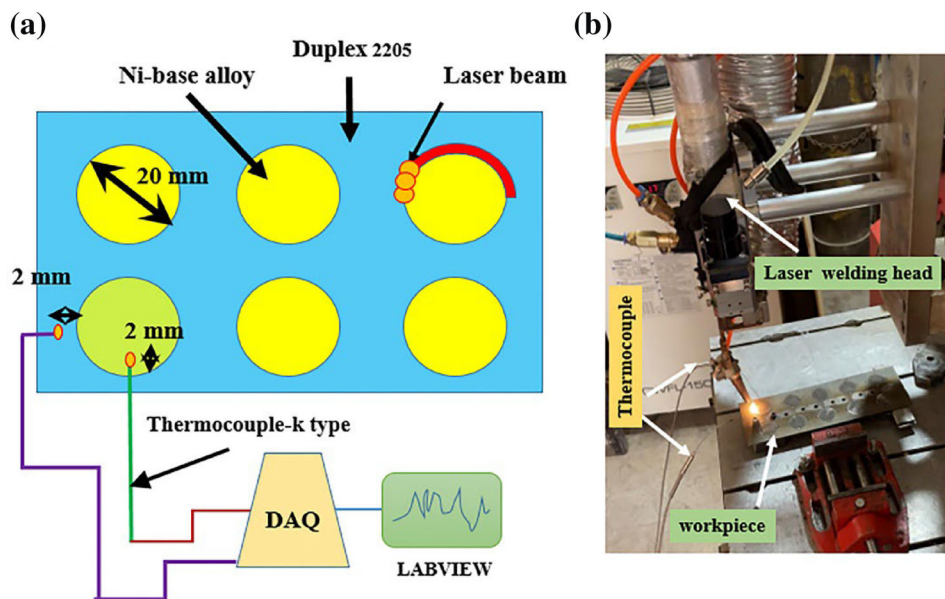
Setup of laser welding experiments: (a) schematic, (b) actual view.
